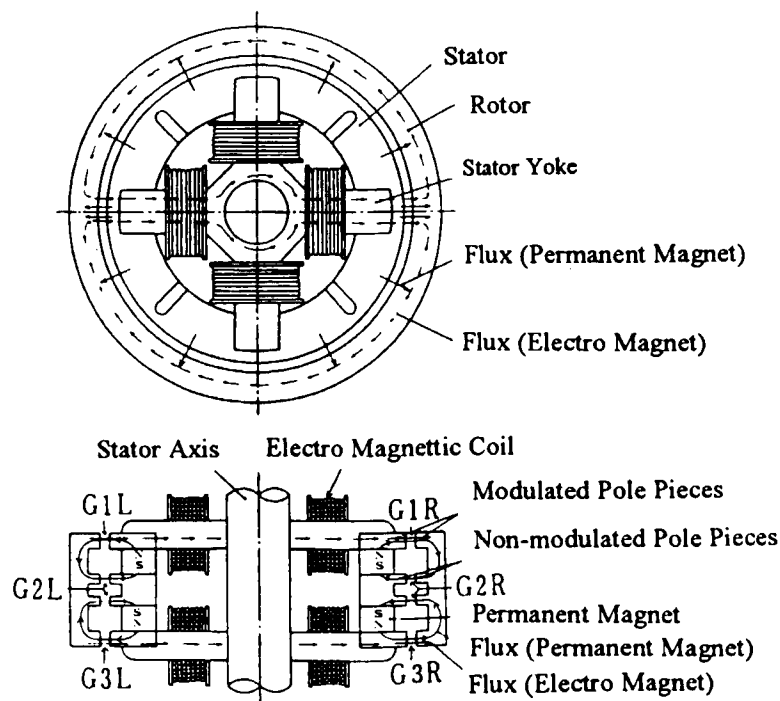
Cross Sectional View of 2-axis Actively Controlled Magnetic Bearings
